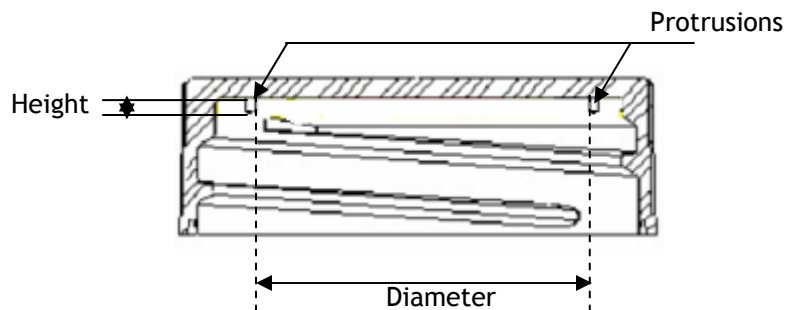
Schema of a linerless cap and its dimensions [6]
